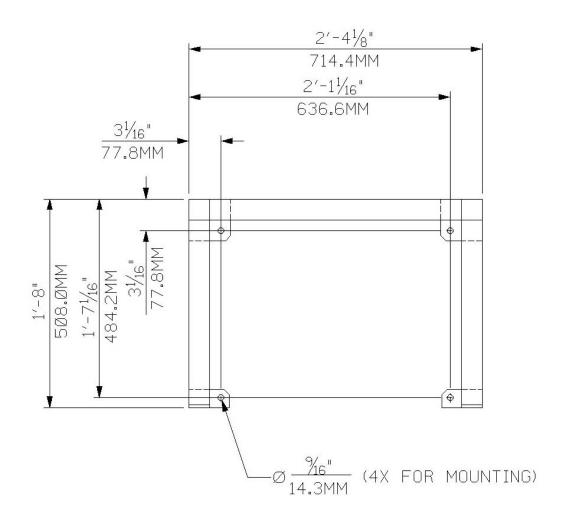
Mounting Hole Locations 2 Cylinder Rack or 2 Cylinder Euro Rack
